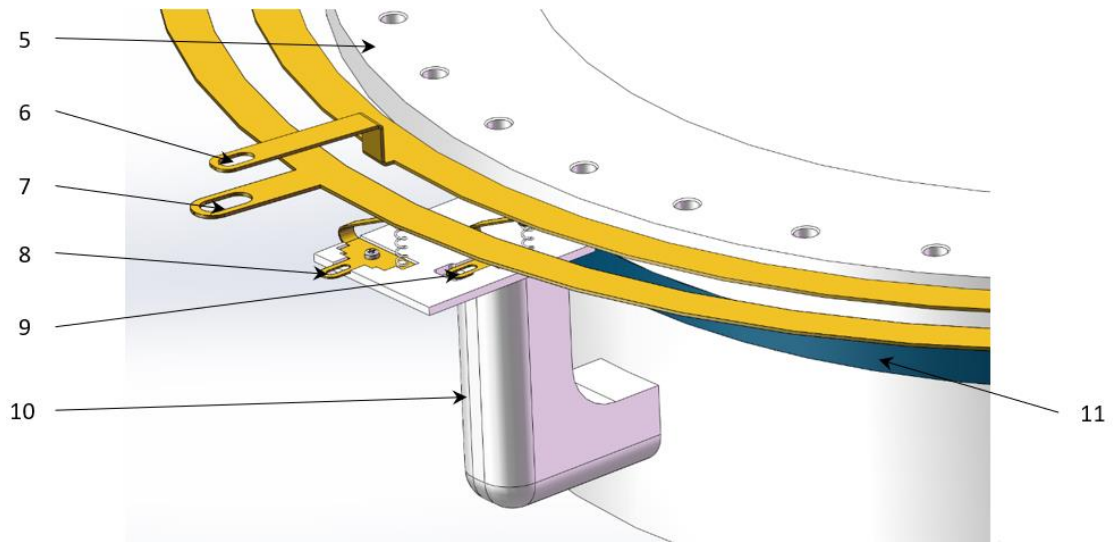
Three-dimensional model of the power transmission device (b) Fixed brush holder
